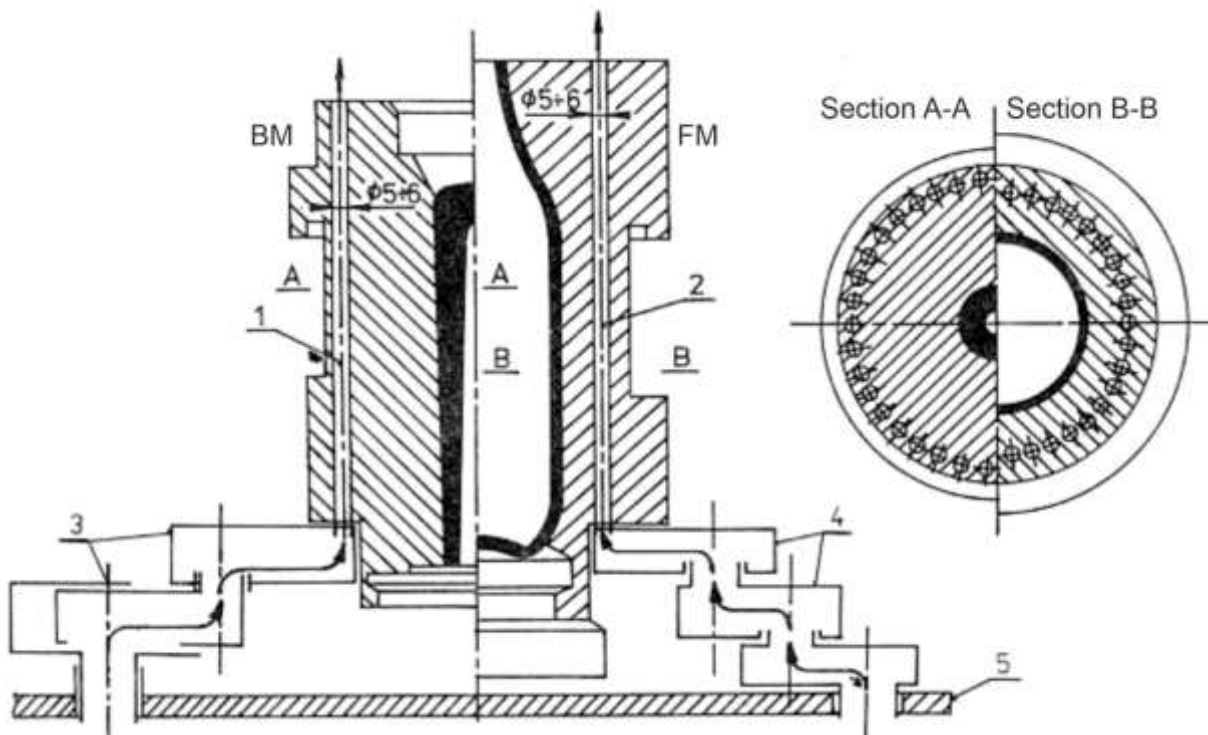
Diagram of axial cooling with feeds of the Heye company: BM - blank mould, FM - finish mould, 1 and 2 - system of cooling holes (boreholes) in BM and FM, 3 and 4 - movable supply of cooling air in BM and FM, 5 - frame of sectioning machine
